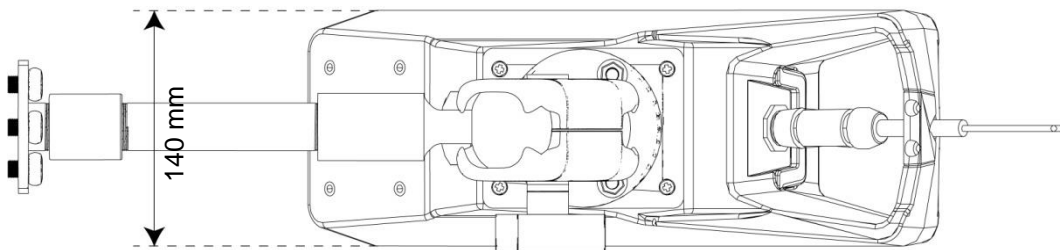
RAVEN-EYE® sensor dimensions top view as installed
